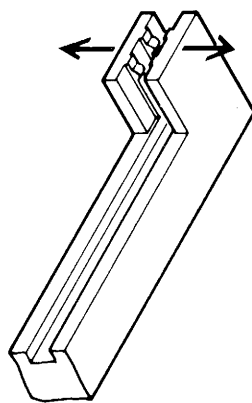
(3). Printed circuit board replacement III (Bottom)
